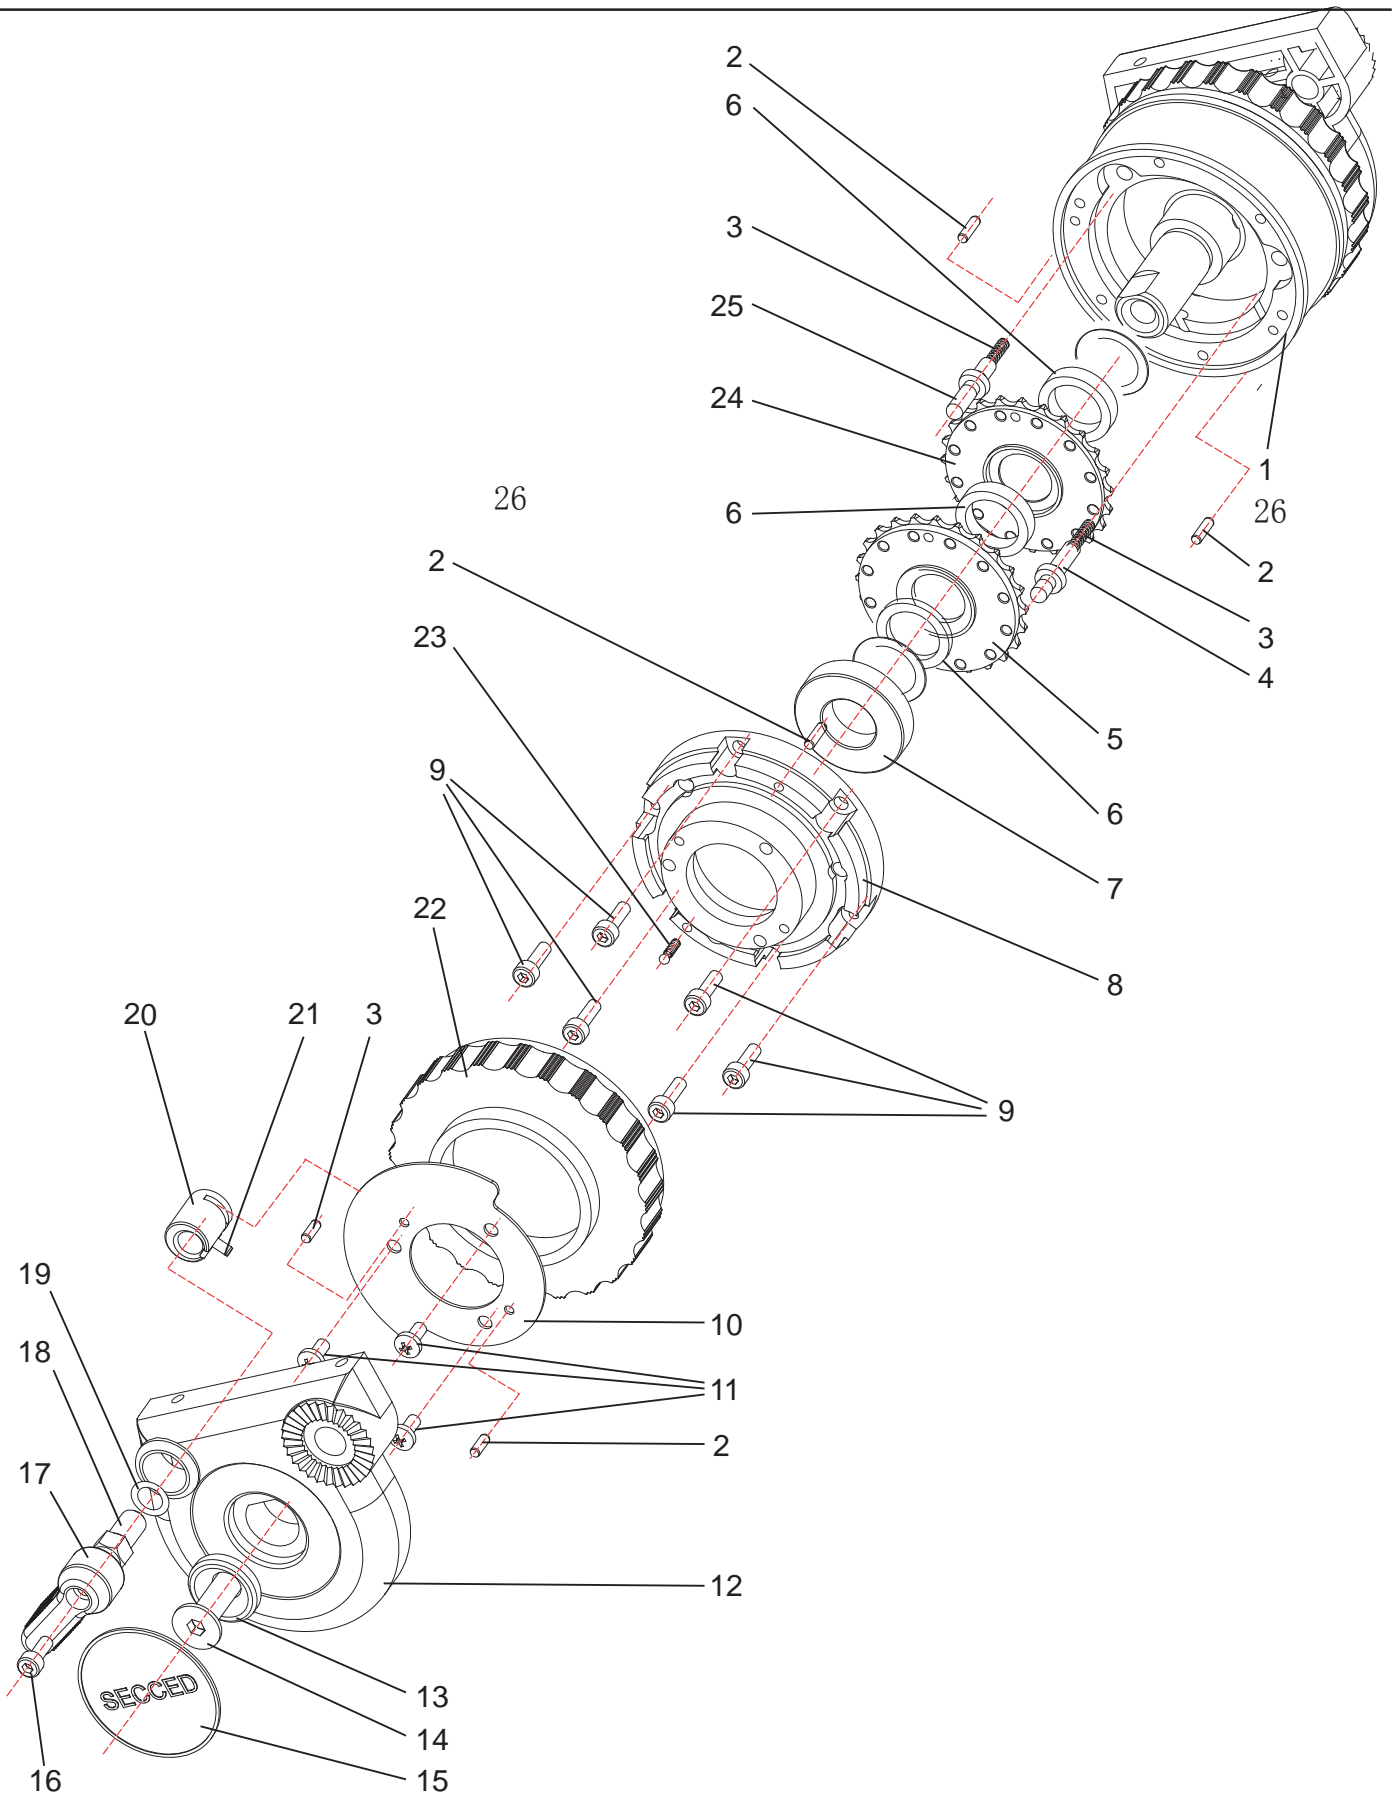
Reach 1 Fluid Head - Slide Plate Lock Assembly
